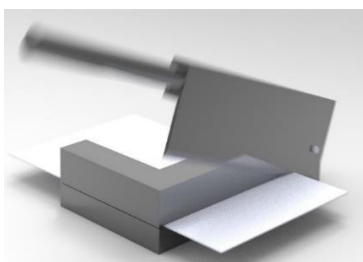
Paper cutter used to cut the specimens, a slot for tensile specimen
